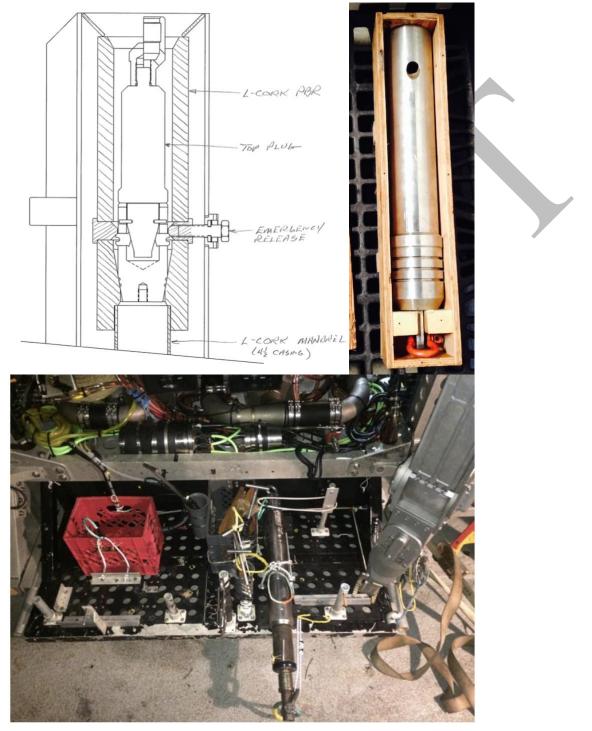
Top left: Schematic of GS running tool (shown connected to top plug in Figure 9). Top right: schematic of RS pulling tool. Bottom: Example of RS pulling tool mounted on Jason basket on dive J2-1031 (on right next to weak link assembly, which is not needed on this cruise).
